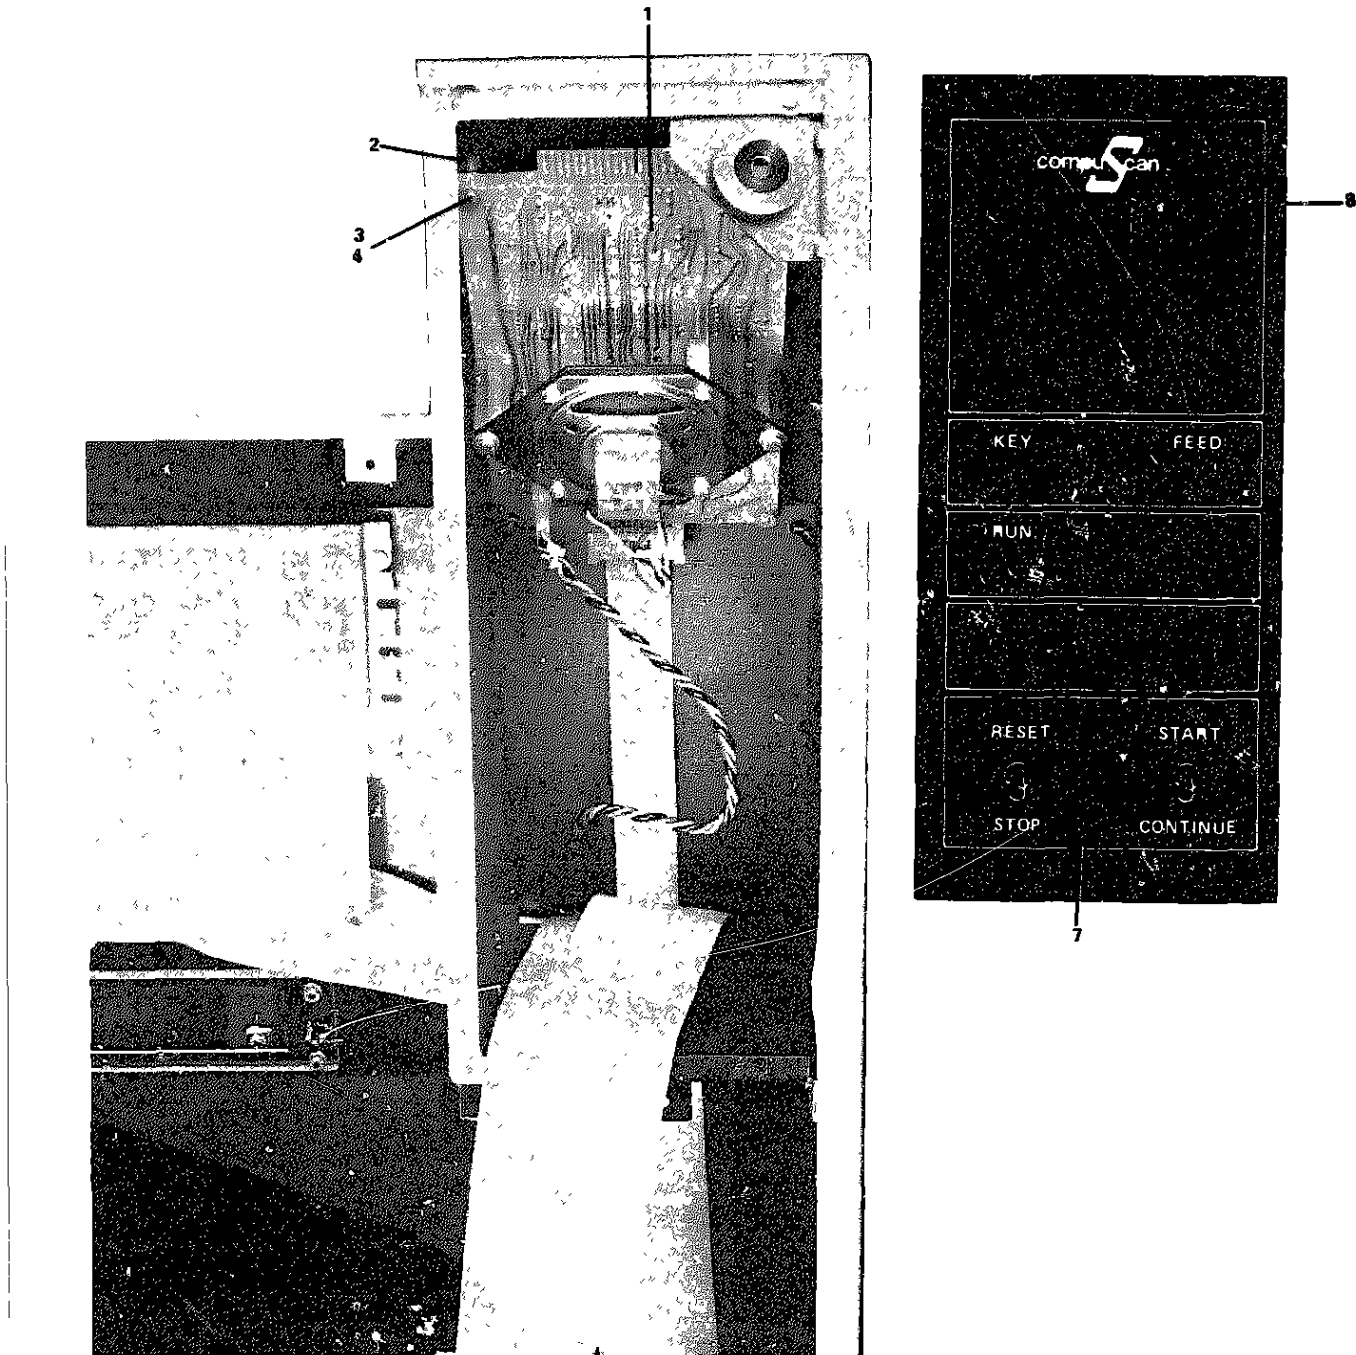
CONTROL PANEL ASSEMBLY 1A6A1
